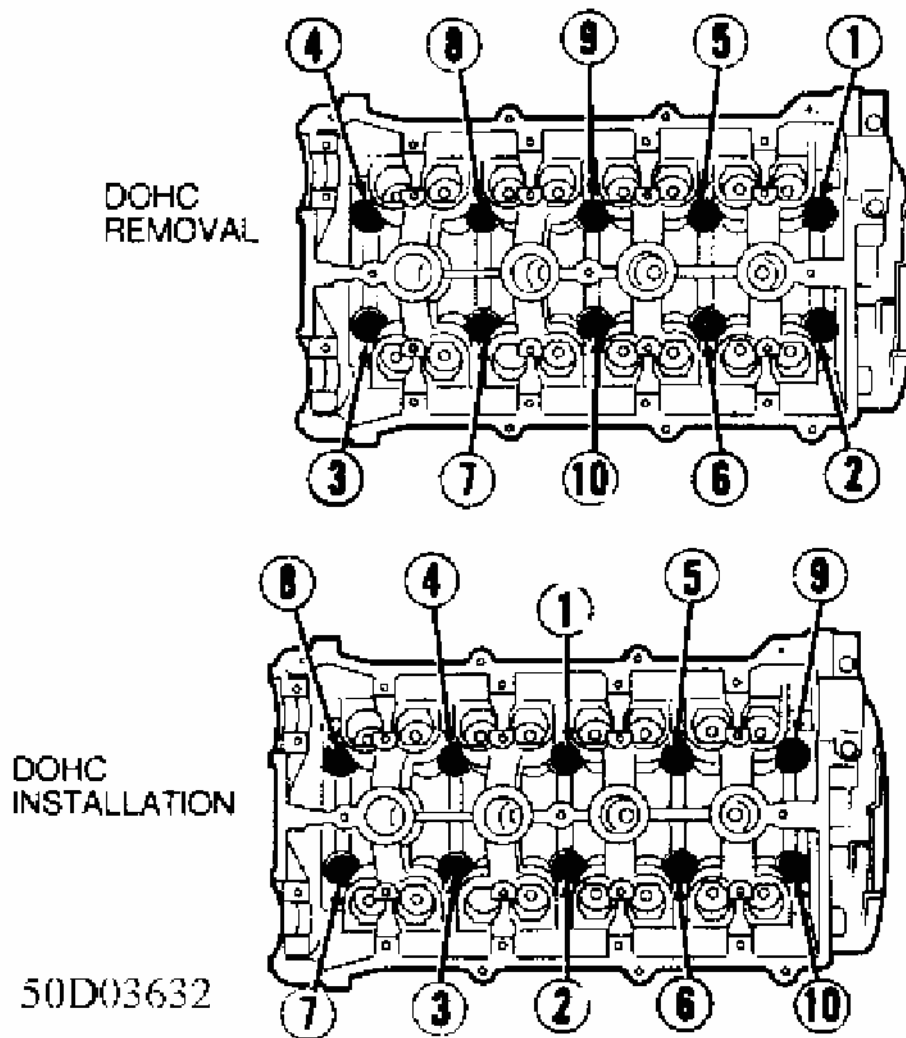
Cylinder Head Bolt Removal & Installation Sequence
